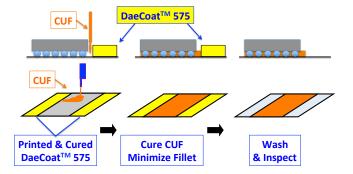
Dispense/printed DaeCoatTM 575 establishes tight CUF geometries.
